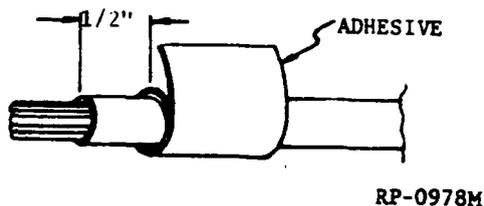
ADHESIVE WRAPPED 1/2" FROM BUTT OF CABLE (PAR. 3.832)
